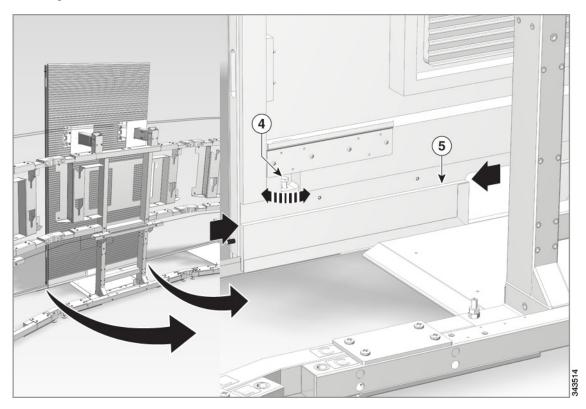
Connecting the Center Wall Frame to the Center Display Structure (1 of 2)—Detail of Center Channel
